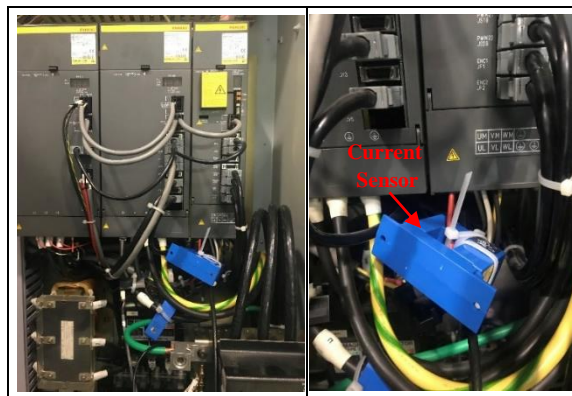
Installed split-core AC-current sensor over spindle motor wiring
